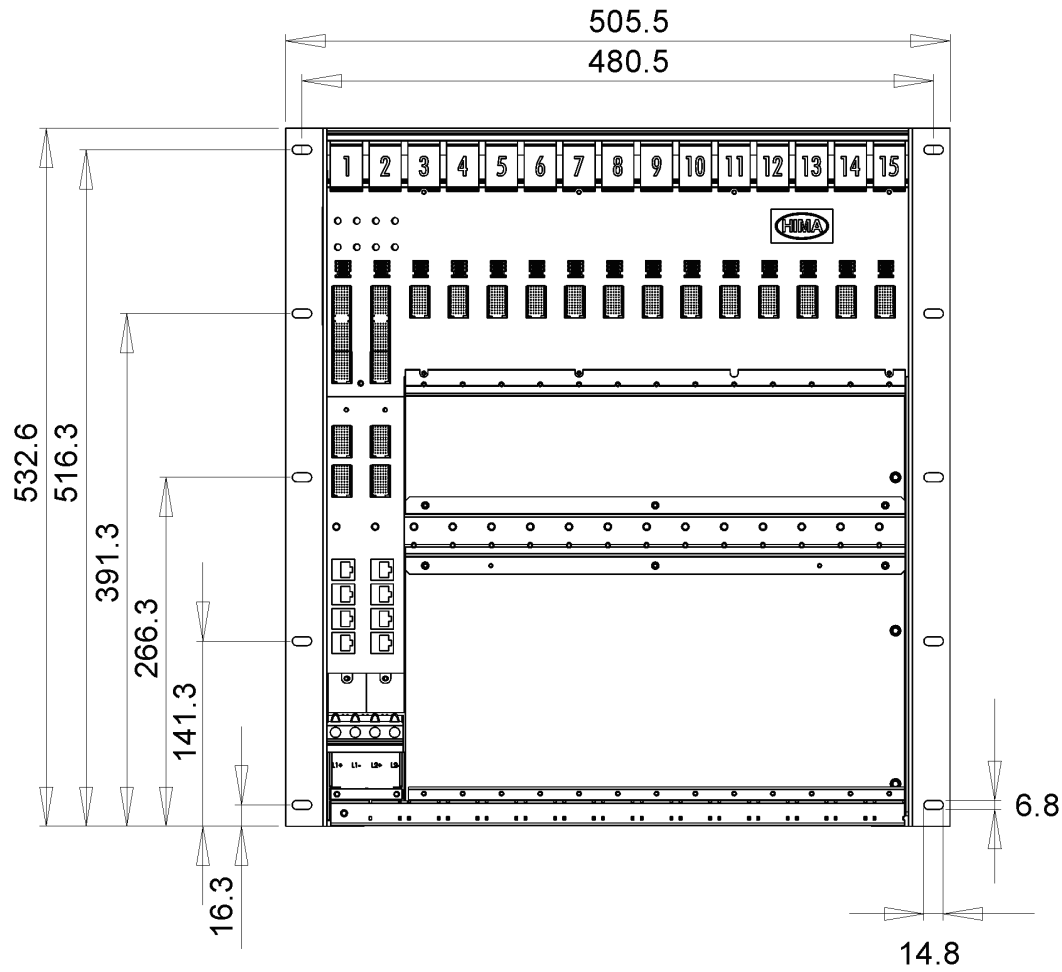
Dimension Drawing of X-BASE PLATE 15 31
